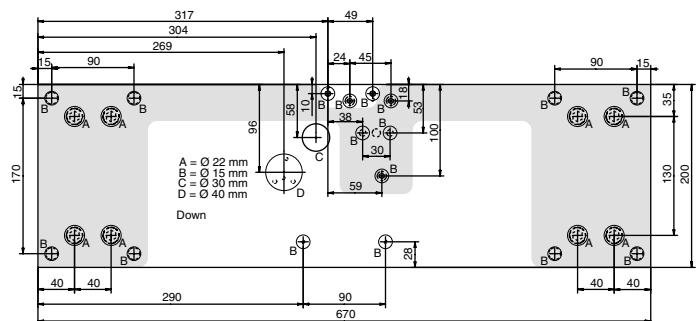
Dimensions of bottom plate (Dimensions in MM)
